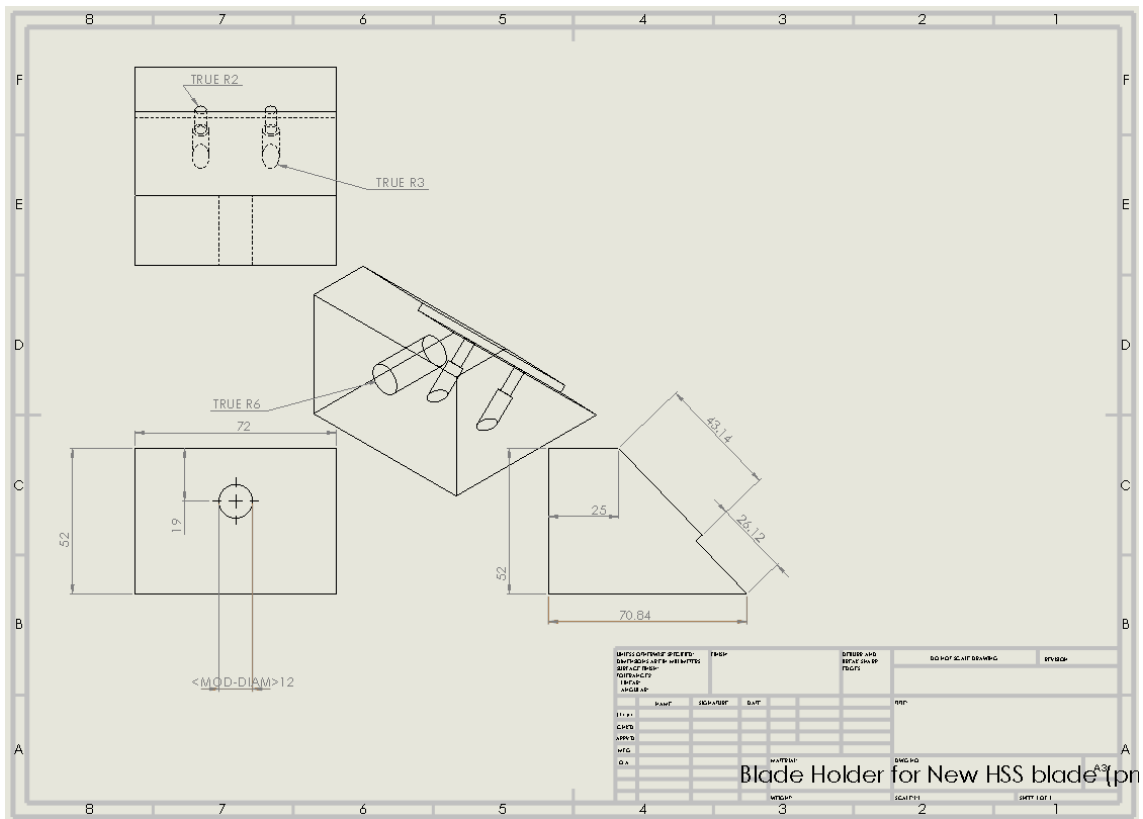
Engineering drawing for the blade holder (Drawing made on SolidWorks)
